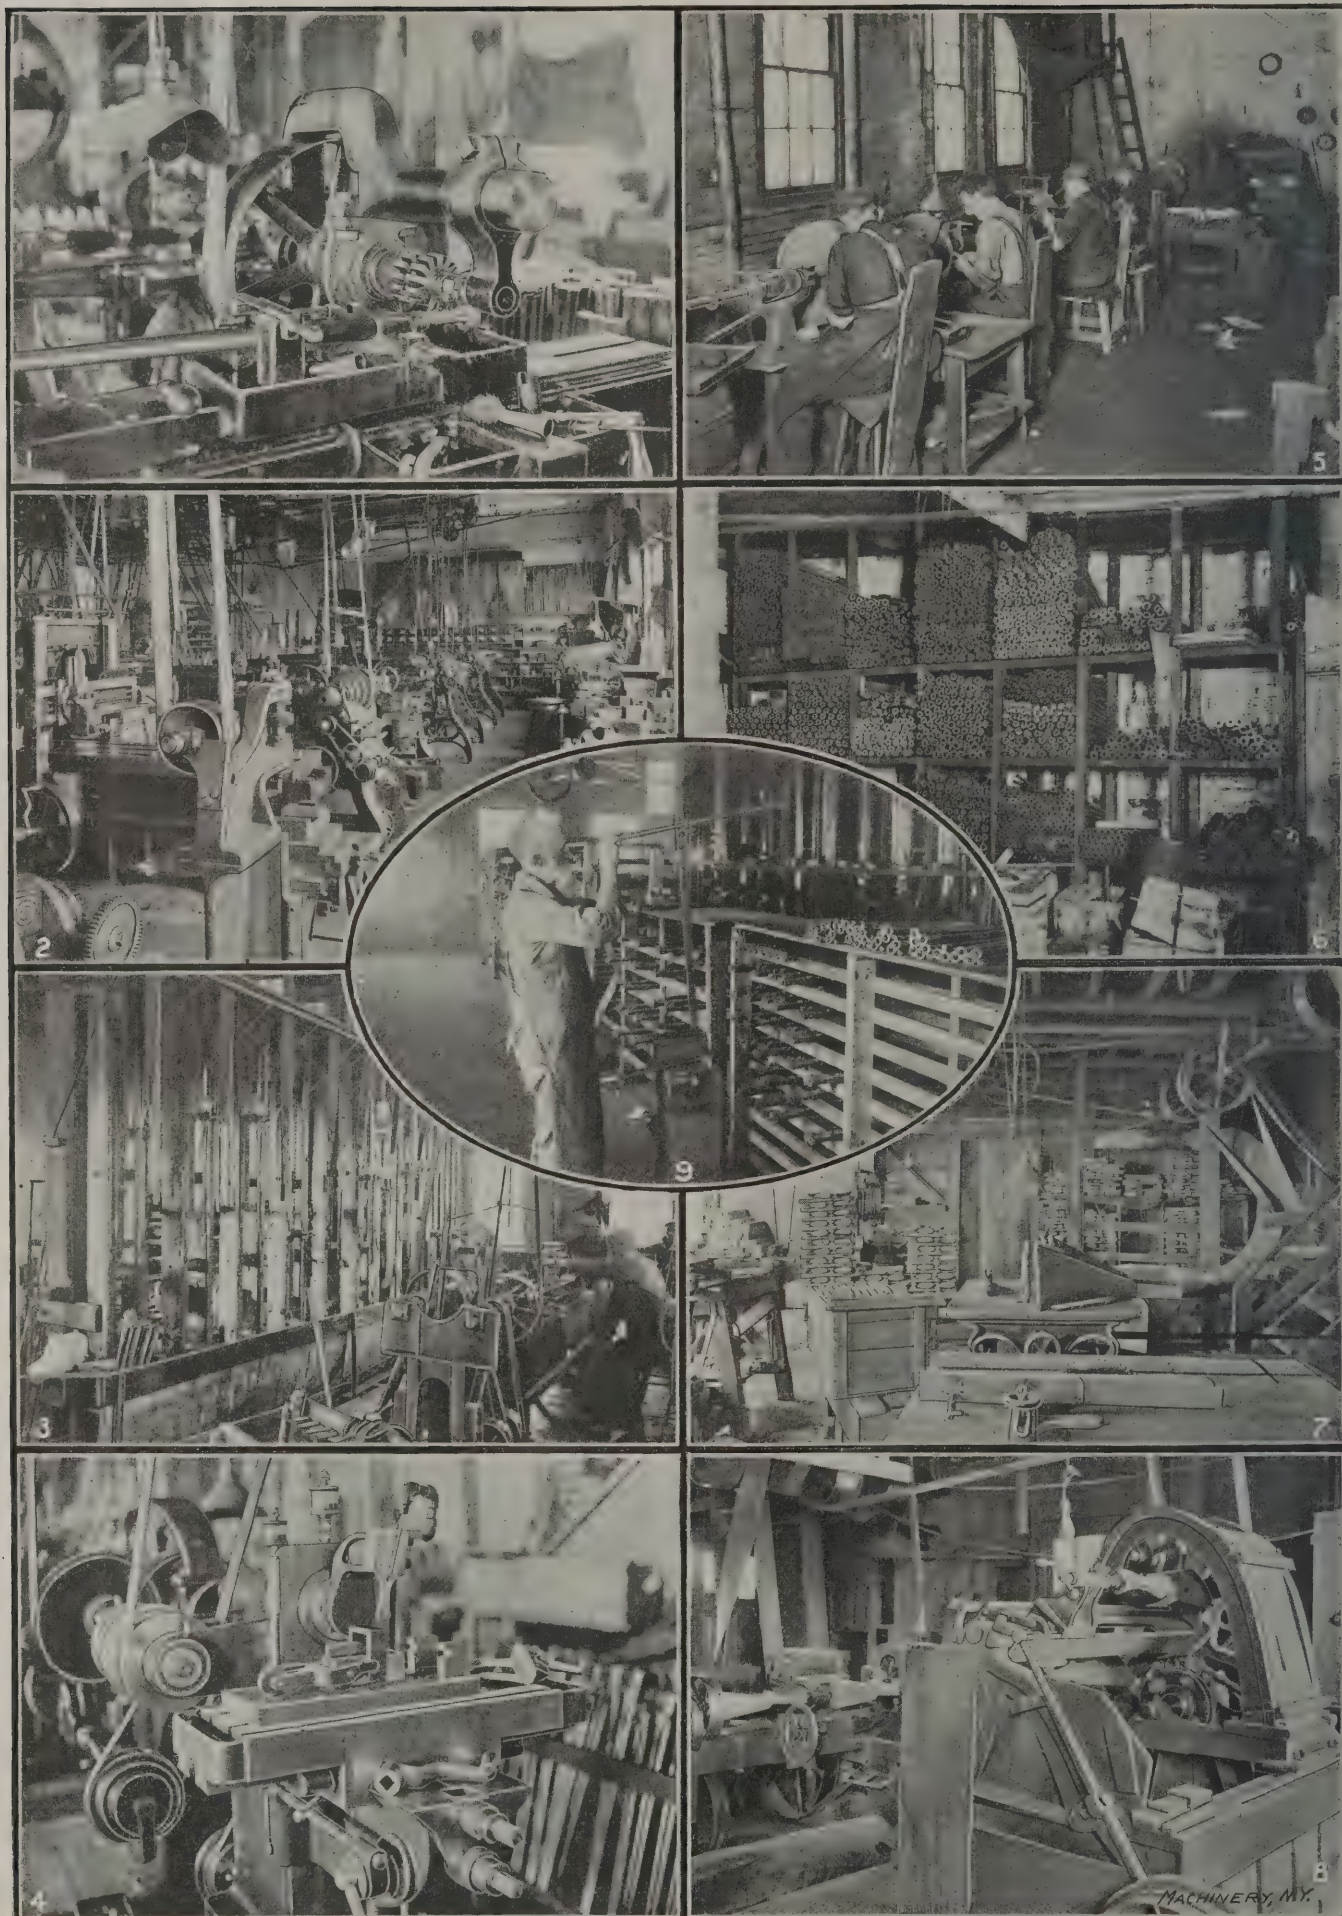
Taking Straddle Cut on Lug in Milling Machine.
